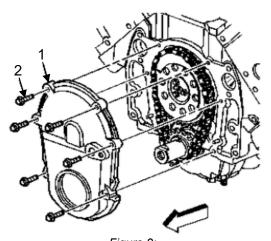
Engine Front Cover (1) and Retaining Bolts (2)
